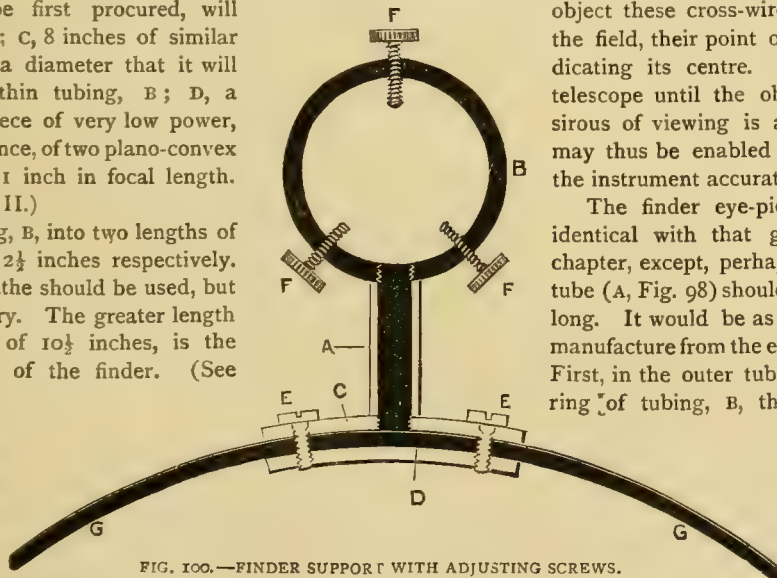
FINDER SUPPORT WITH ADJUSTING SCREWS.
